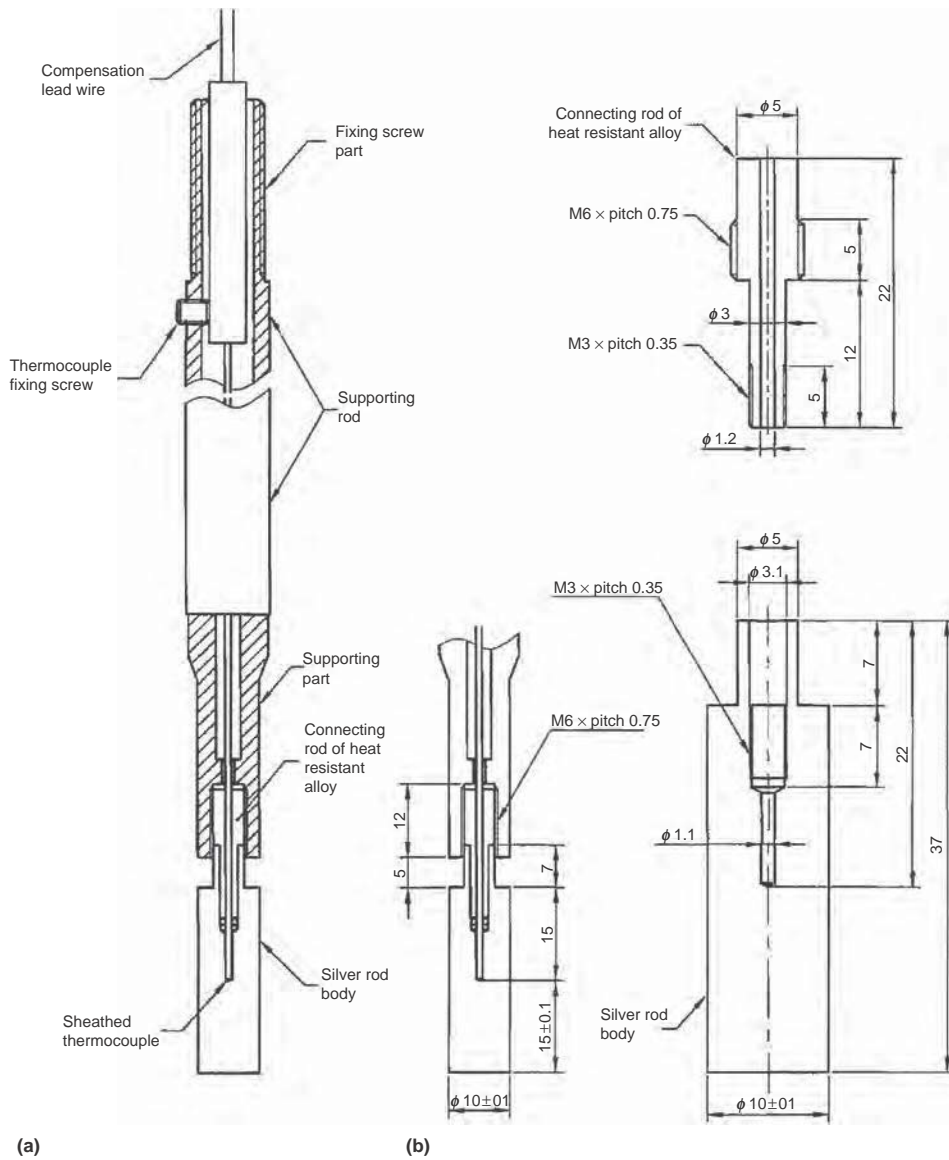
Schematic illustration of the silver probe used in ASTM D7646 (a) general assembly, (b) probe details. All dimensions are in millimeters. Source: Ref 103
